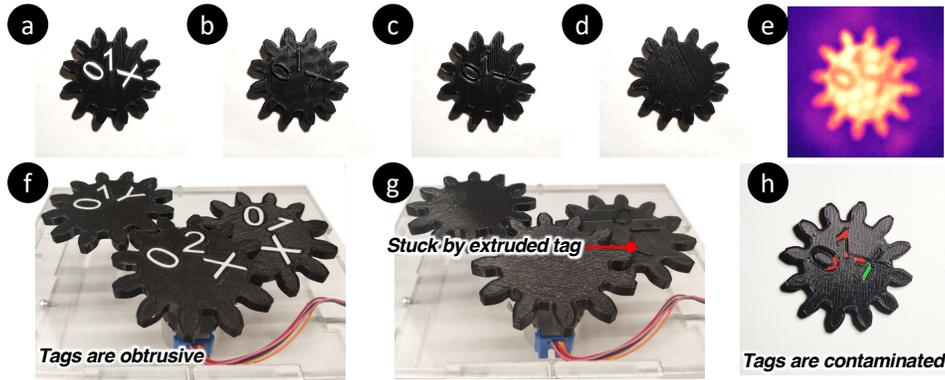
Demonstration of different tagging methods by printings. The example is to 3D print a tag for a gear with the part number (01X). (a) The tag is printed on the surface using another color. (b) The tag is printed above the surface with extrusion upwards. (c) The tag is printed by extruding the tag inwards (like engraving). (d) The tag is printed under the surface. (e) The tag is read under the thermal camera for the object in (d) after the surface is warmed by hand. (f) Illustration of multiple gears with labels on the surface. (g) Illustration of malfunctioning gears tagged by extrusion in (b). (h) Illustration of visual contaminated tagged in (c).
